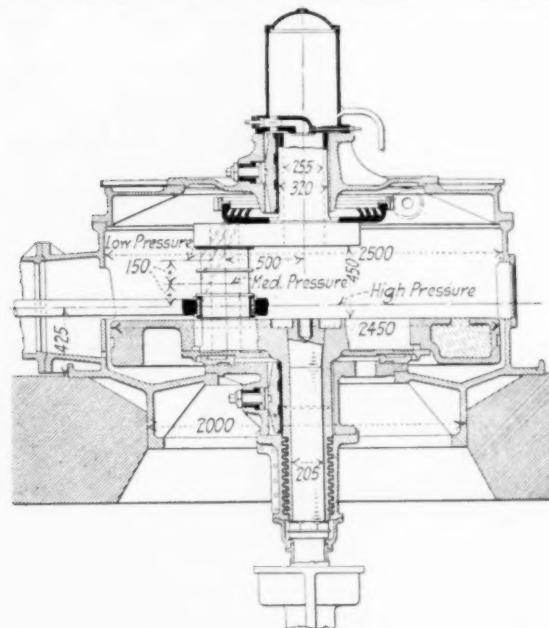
SECTION THROUGH THE BEARINGS OF THE PUMP SHOWN IN FIG. 11
